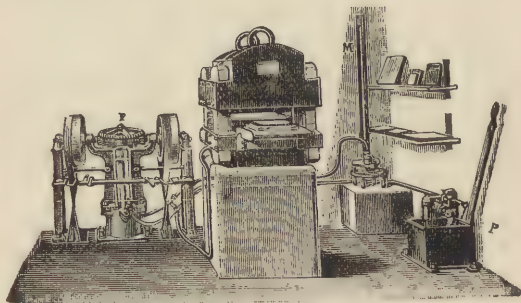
HYDRAULIC PRESS FOR MAKING WOODBURY MOULD.
